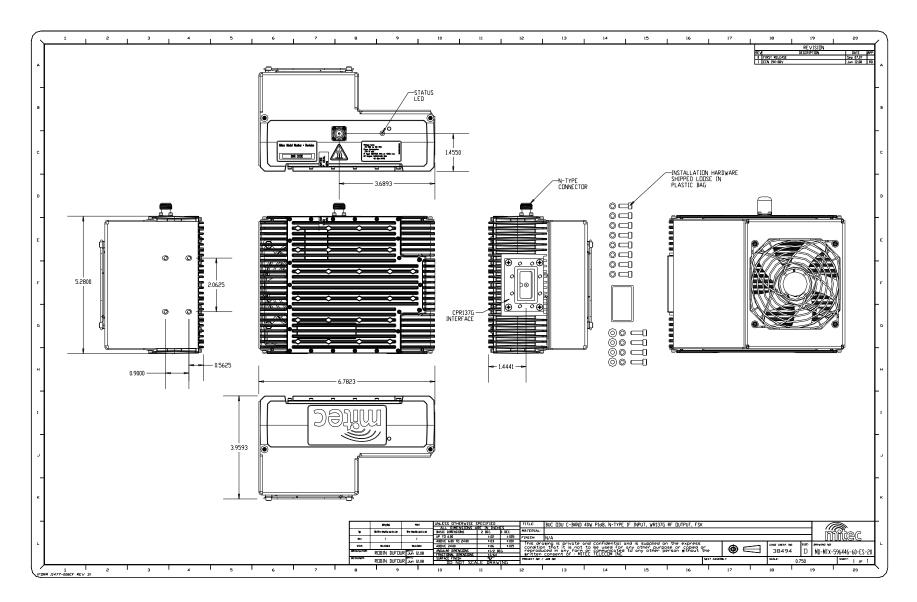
MTX-596x43/46-60-ES-20 – Outline drawing
